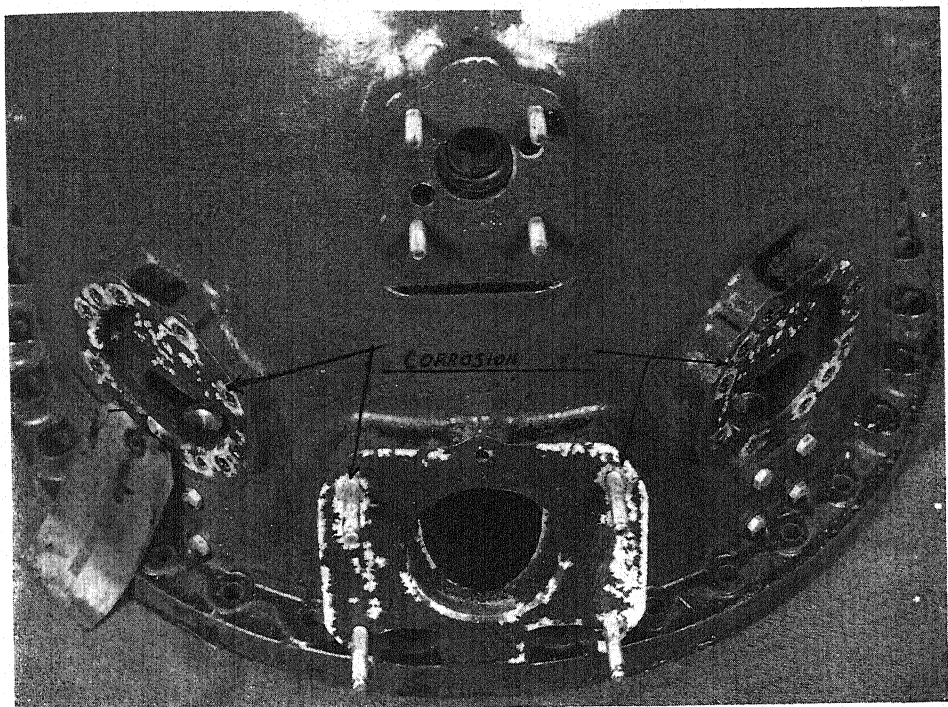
Corrosion of Magnesium Nose Section of Aircraft Engine Due to Improper Priming of Faying Surfaces and Improper Insulation of Dissimilar Metal Contacts, That Is, the Cadmium-Plated Studs and Inserts.
